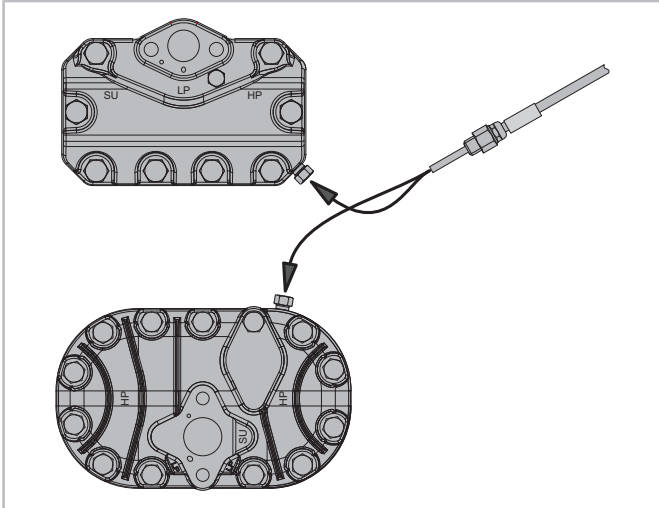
With start unloading, mount the temperature sensor directly on the SU cylinder head.
